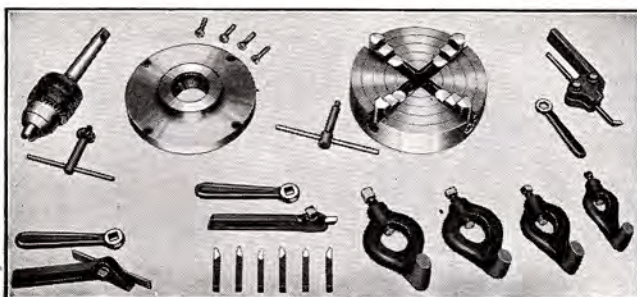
No. 105-W Chuck and Tool Assortment for 9-inch "Workshop" South Bend Lathes.
